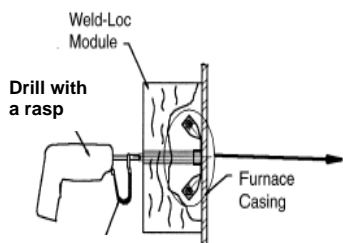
Stud Gun with rasp and Torque Tube (part of module assembly).
